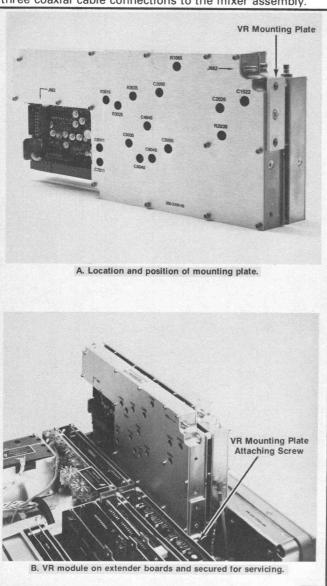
Preparing the VR module for service showing how it is supported when on an extender.
